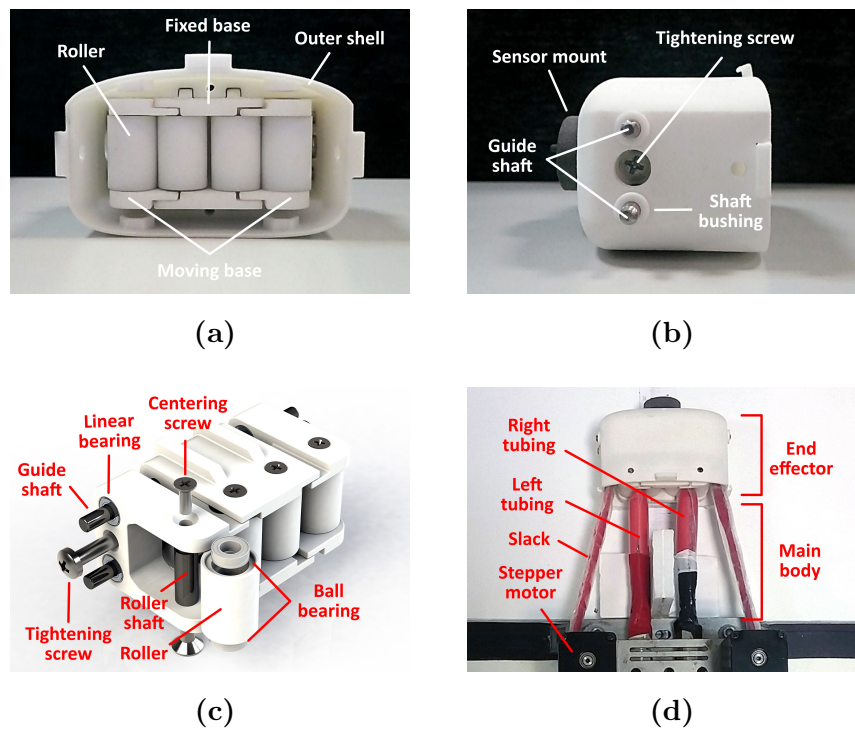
(a) Back view of the end effector showing the four main components: roller, fixed base, moving base and outer shell. (b) Side view of the end effector. (c) Exploded view without the outer shell (CAD) showing interior components. (d) Top view of end effector after the tubings are attached [39].
